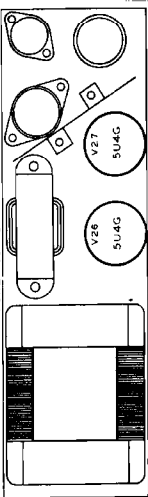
Tube and Trimmer Layout 29G20 Chassis
